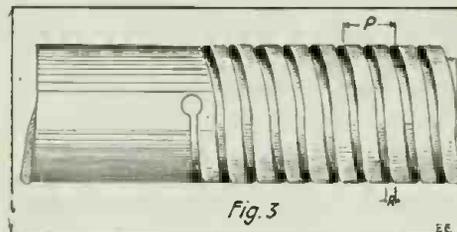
In Cutting a "Double Thread," the Thread Cutting Tool Must Be Ground to Have a Thickness of One-half That Used for Cutting a Single Thread As Becomes Evident. The Pitch of the Single Thread Is Indicated By P in the Drawing, and is Equal to the Thickness of Two Threads and Two Spaces. This Makes the Width of the Threading Tool Equal to One-quarter of the Pitch P.
